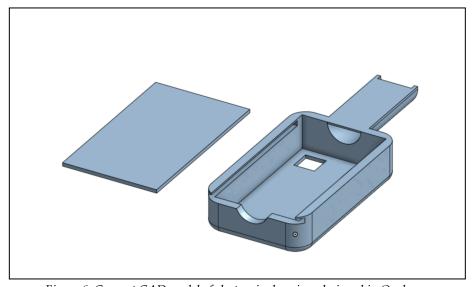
Current CAD model of electronics housing, designed in Onshape.
